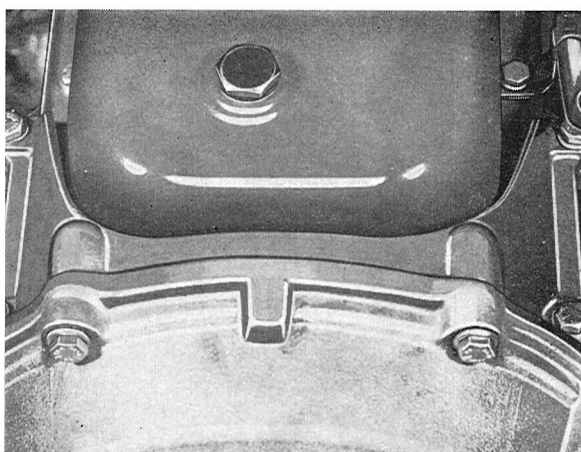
Reinforcing bracket, cylinder block—flywheel housing
